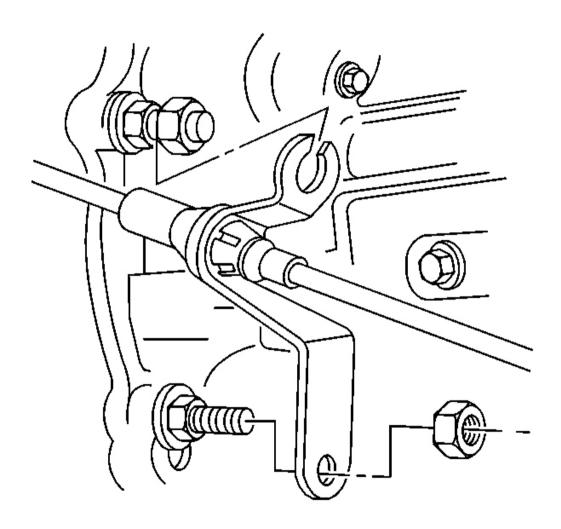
Shift Control Cable Bracket & Nuts Courtesy of GENERAL MOTORS CORP.
